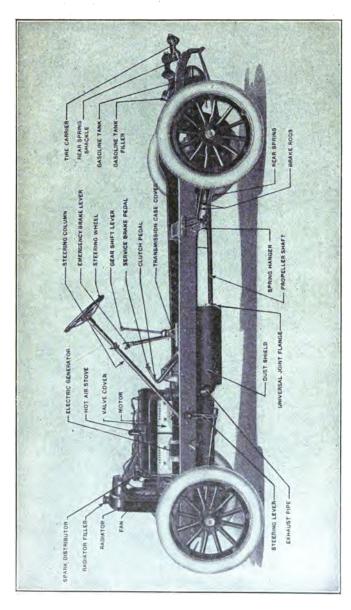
Plan View of the King Eight Cylinder Chassis, Showing Arrangement of Parts.
